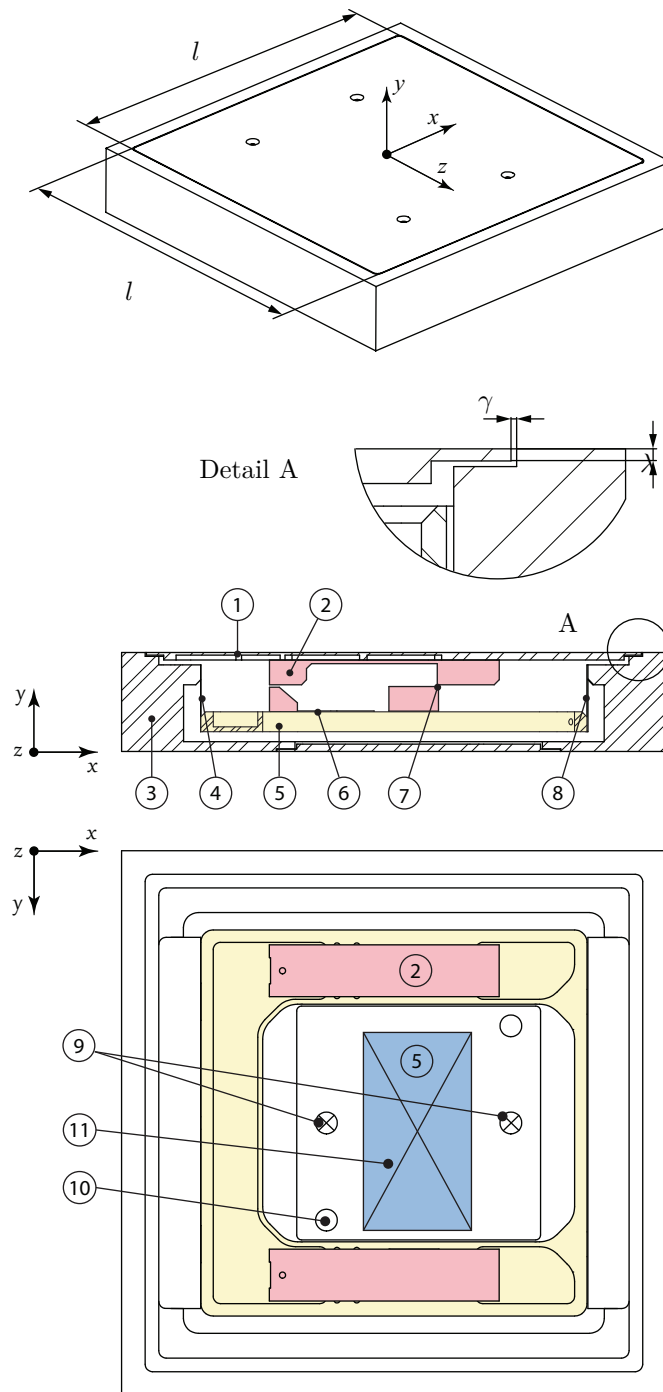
DRAWINGS OF THE FLOATING-ELEMENT BALANCE. From top to bottom: isometric view with general dimensions, slice along the  $X$ - $Y$  plane and top view. (1) Floating element, (2) holders, (3) sealed chamber or casing, (4) flexure, (5) floating frame, (6) pitching moment transducer, (7) pivot point, (8) WSS transducer, (9) outlet to the blower, (10) static pressure taps, (11) acquisition module.
